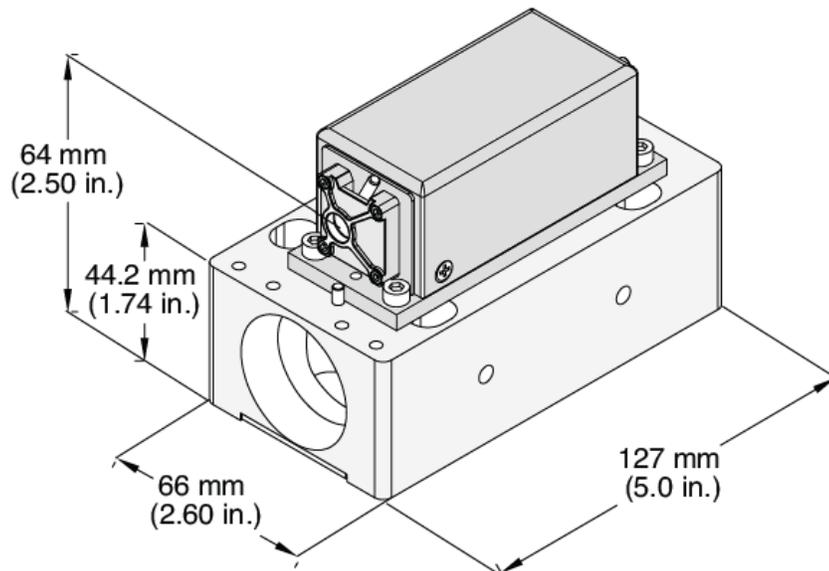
Dimensions — Optional CUBE Heat Sink
